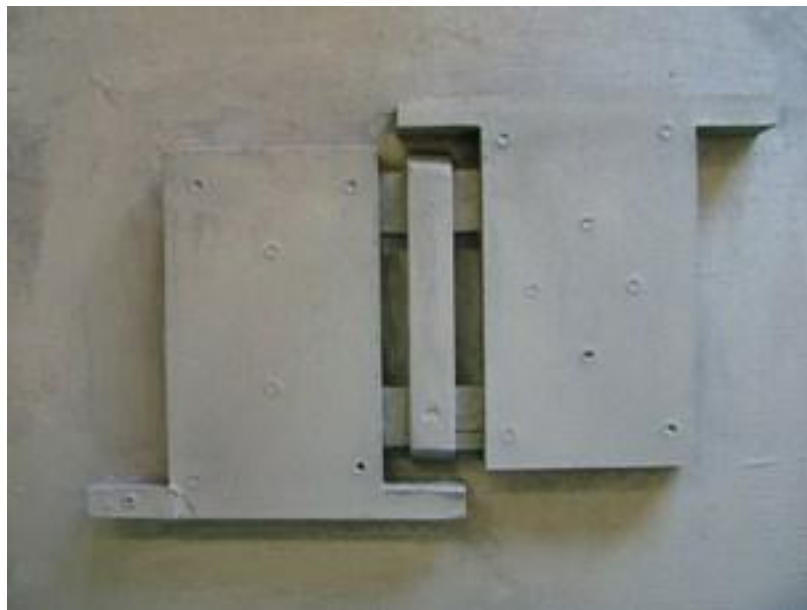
3. Photograph of the pattern used in mould preparation of anodes (first design)
